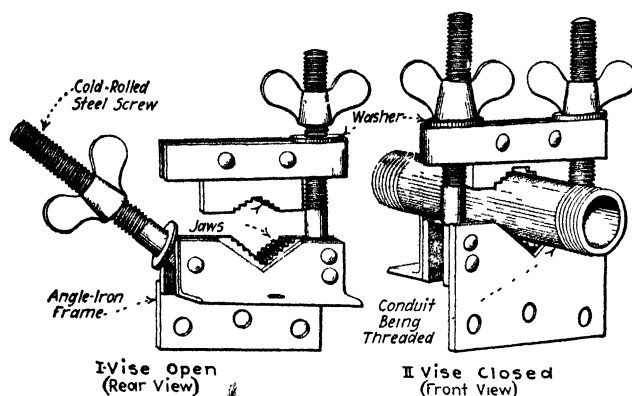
The Nye pocket vise. Manufactured by the M. B. Austin & Company, Chicago, Ill.
